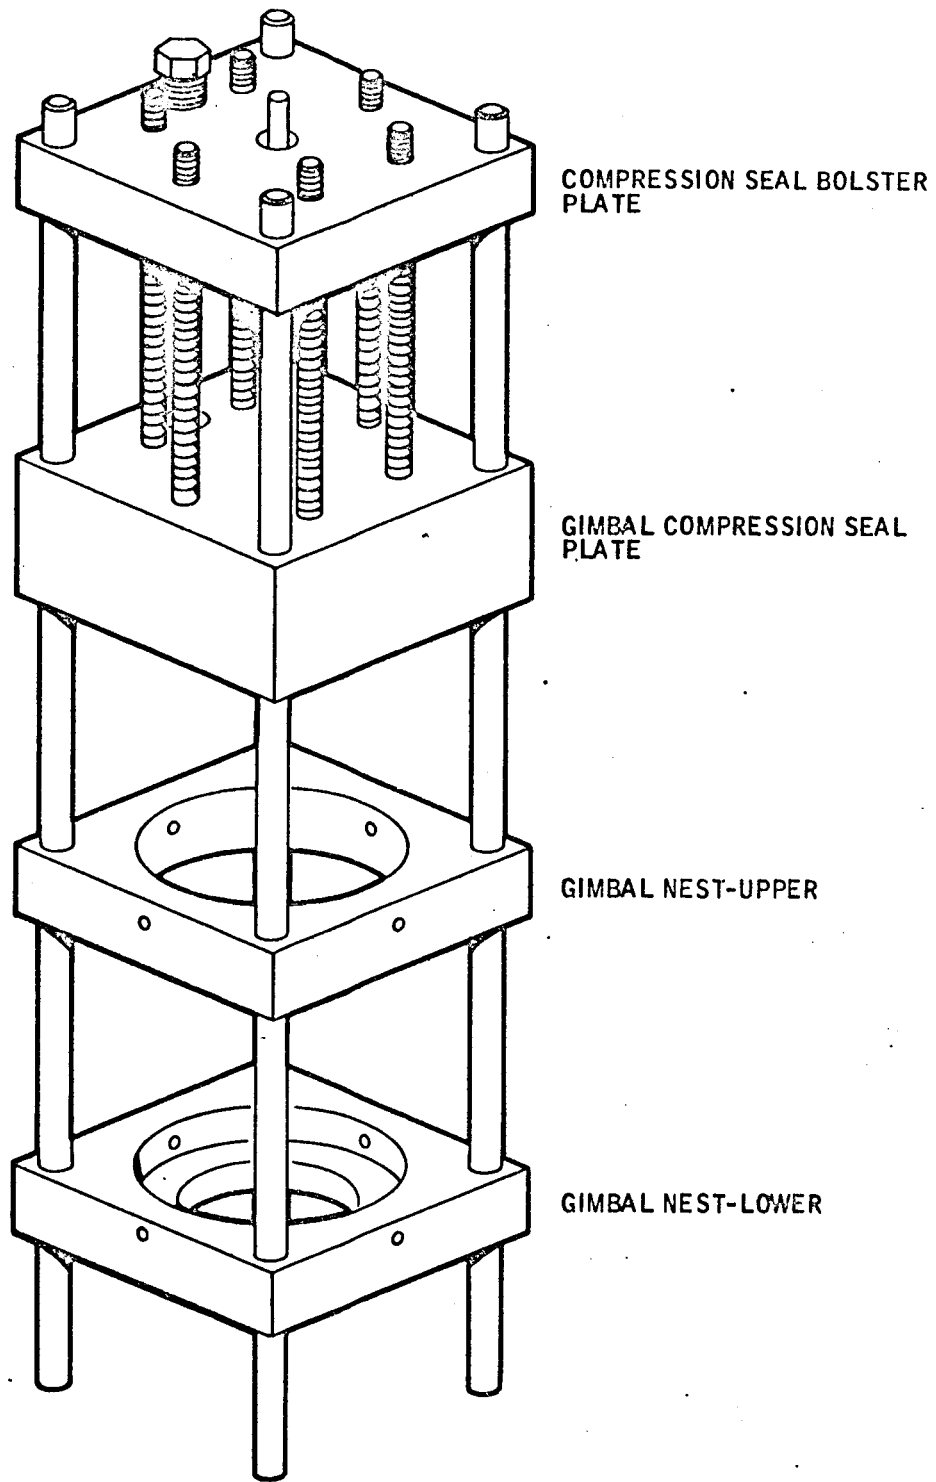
GG159E/GG334S Gimbal Gas Sampling Fixture
